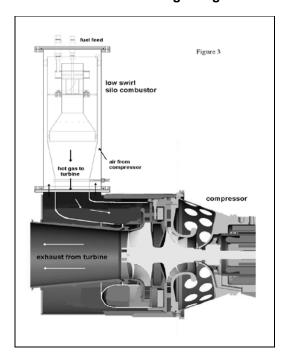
Schematic of Fully Assembled MTG and Silo Combustor
